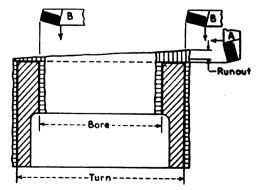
Tool A takes facing cut removing scale and runout on back of casting. Tools B then take turning and boring cuts. This practice enables tools B to hold size better throughout entire length of cut since they start in clean metal
